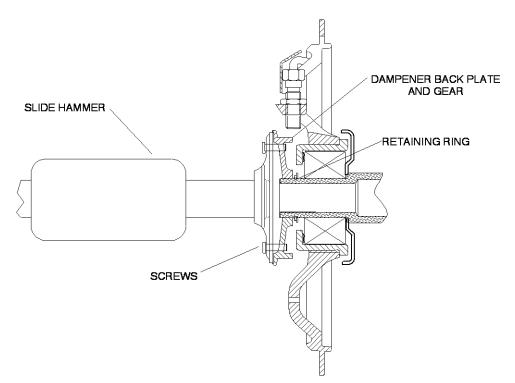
Removal of the Dampener Back Plate and Gear from the Armature Shaft
